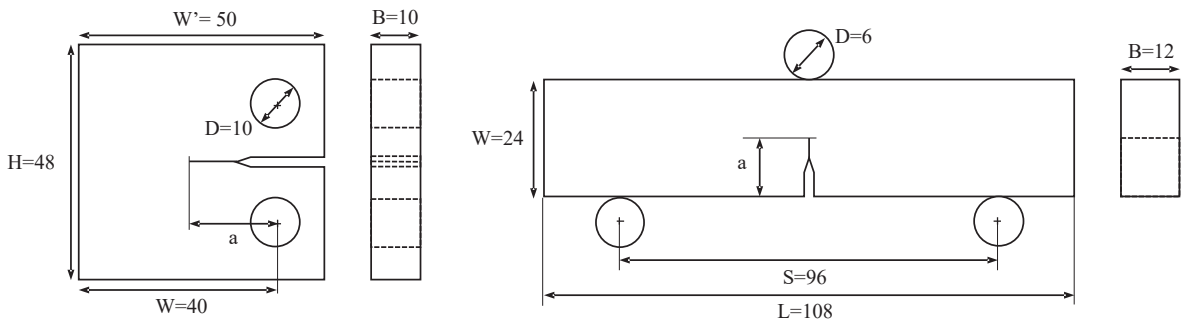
Specimens’ dimensions schemes. Lengths in millimetres.
